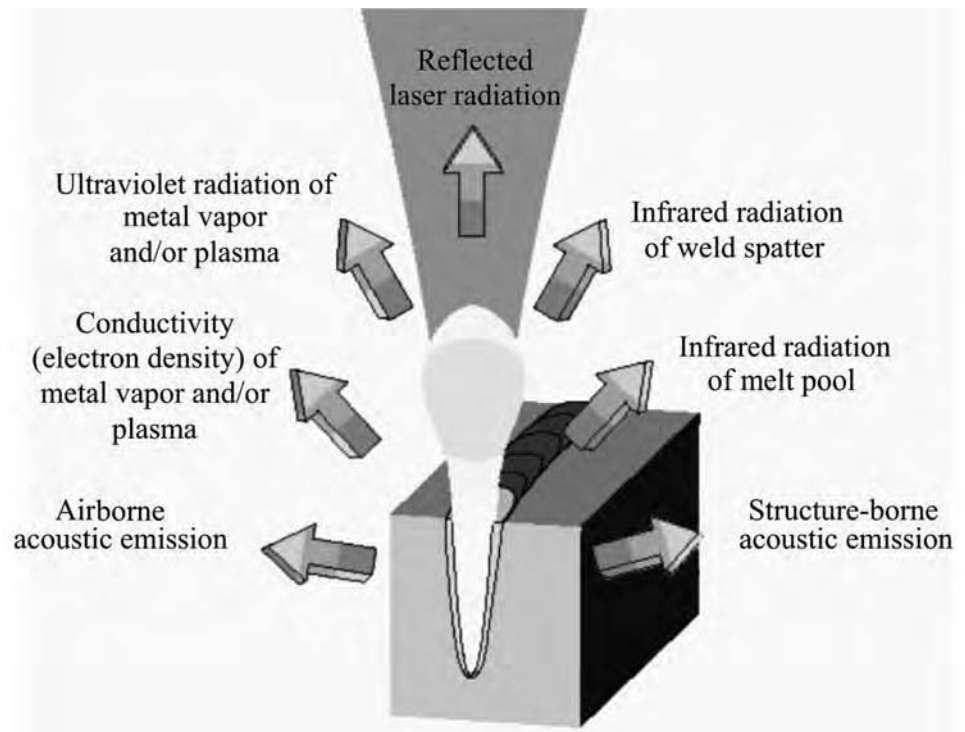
Signals from a penetration (keyhole) laser weld
